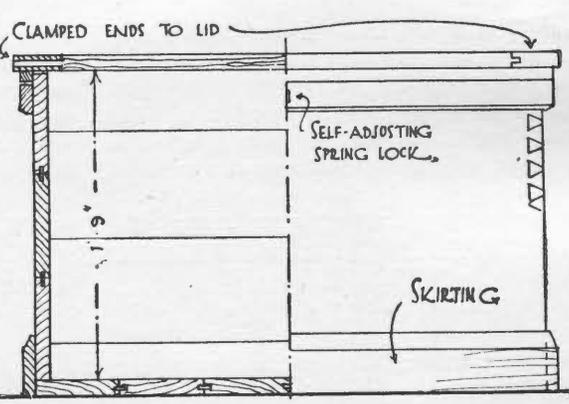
Half Longitudinal Section and Front Elevation of Tool-chest
